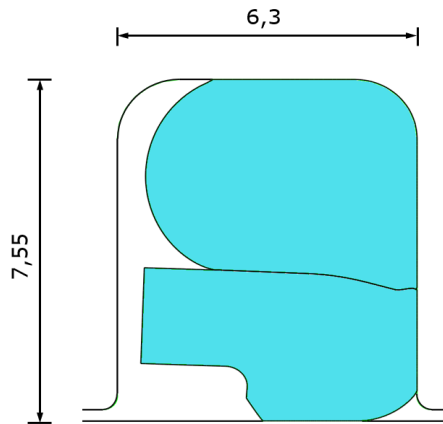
Step-seal RSK300500 with groove dimensions at a rod diameter of 50 mm
